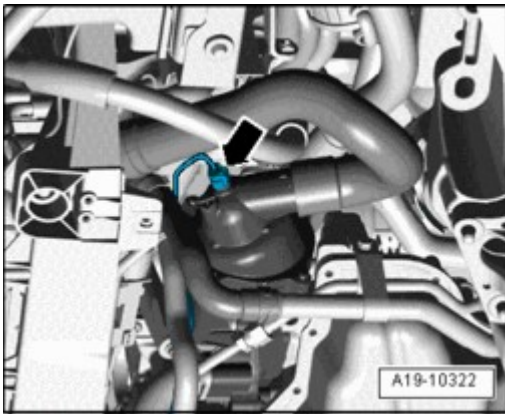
Disconnecting Electrical Connector On Map Controlled Engine Cooling Thermostat F265
